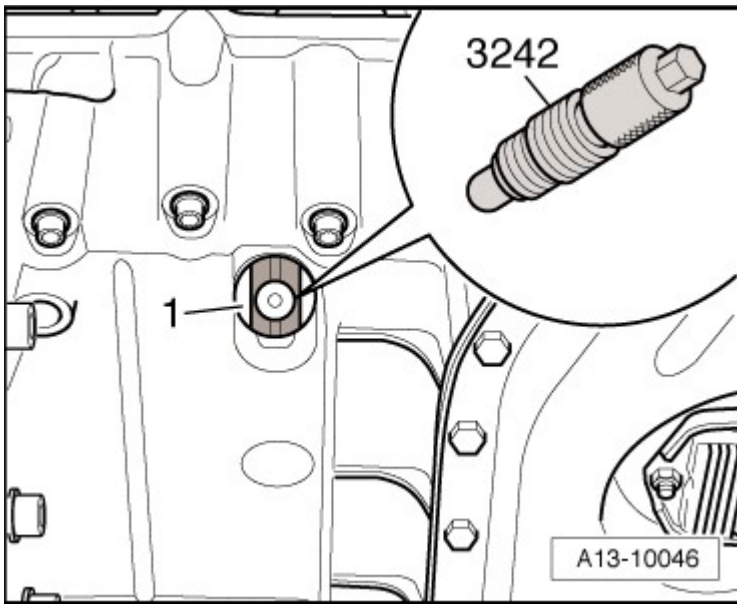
Identifying Crankshaft Holder 3242 In Bore
